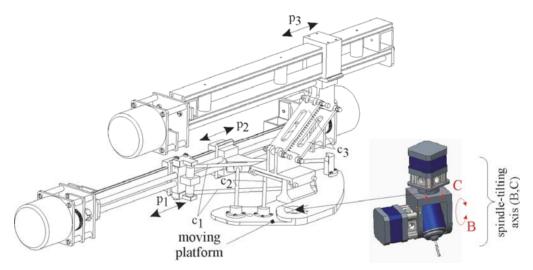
Model of the parallel mechanism pn101_st with two-axis spindle-tilting head
